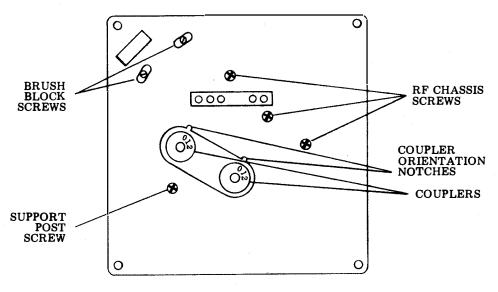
RF Amplifier Assembly A2A4, Bottom View, Disassembly Screw Locations
